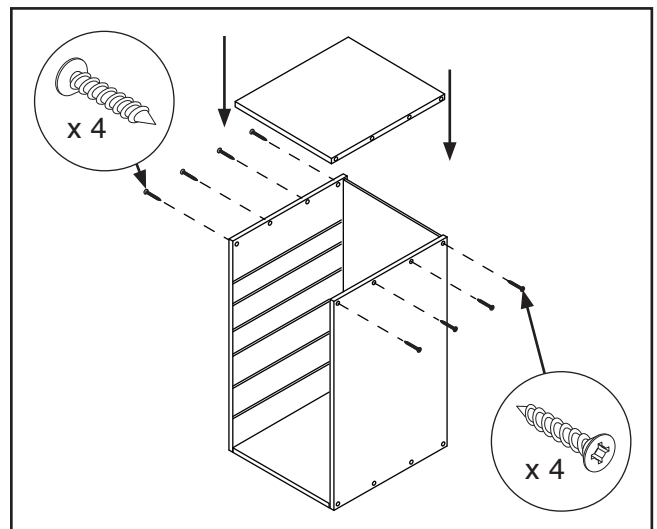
Securing cabinet side panels to cabinet base panel.
